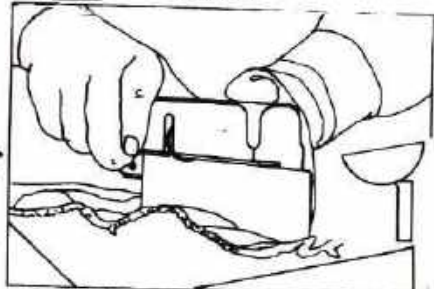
RAISING EDGES WITH A SCRAPER SHARPENING DEVICE
